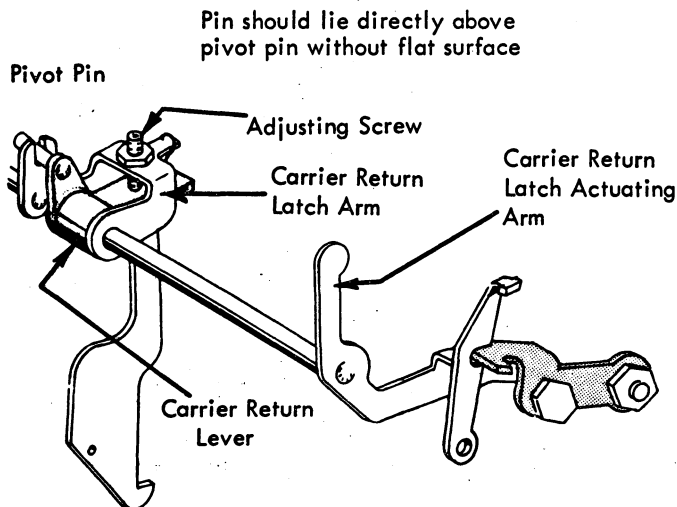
Clutch Latch Overthrow Adjustment (15 Inch Machine)
